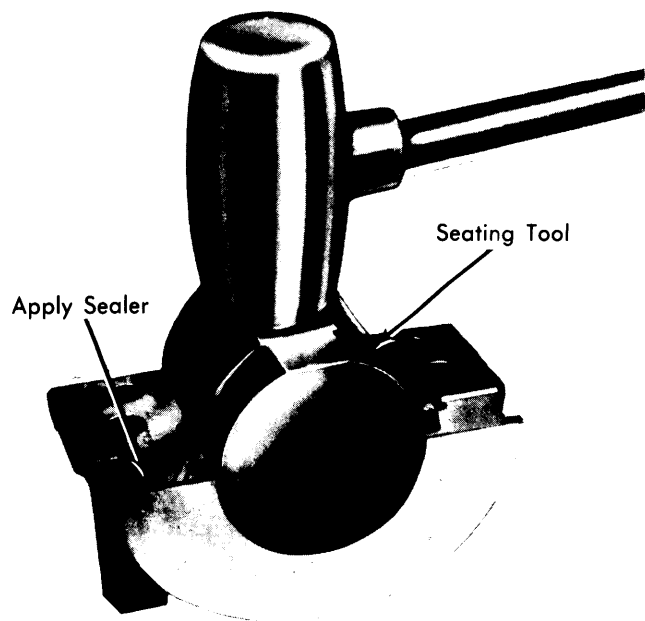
Correct Procedure to Install Rear Main Oil Seal
